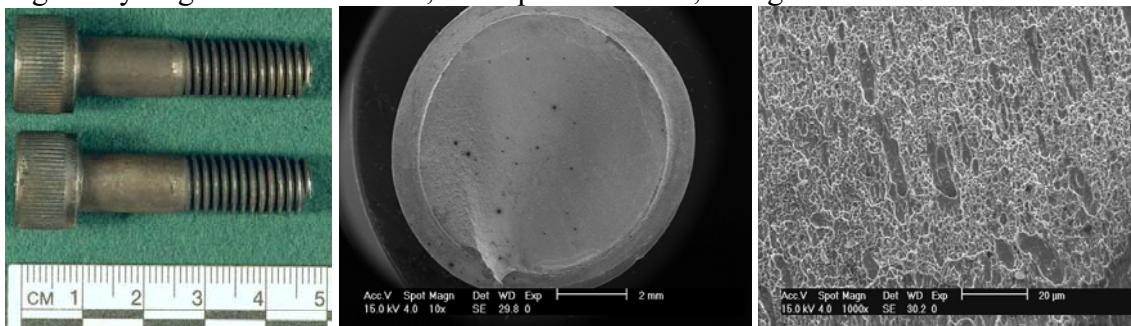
Ductile torsional overload failure; smooth fracture with ductile dimple fracture mode.
